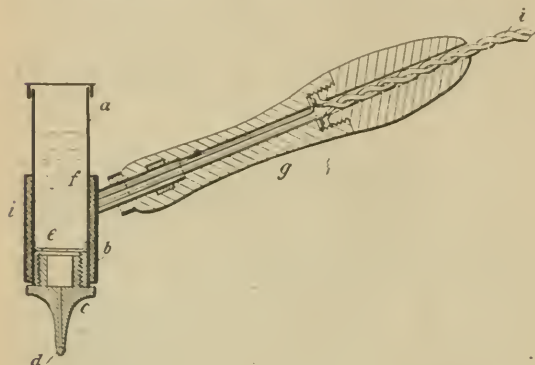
SECTIONAL VIEW OF ELECTRIC BATIK PENCIL.
